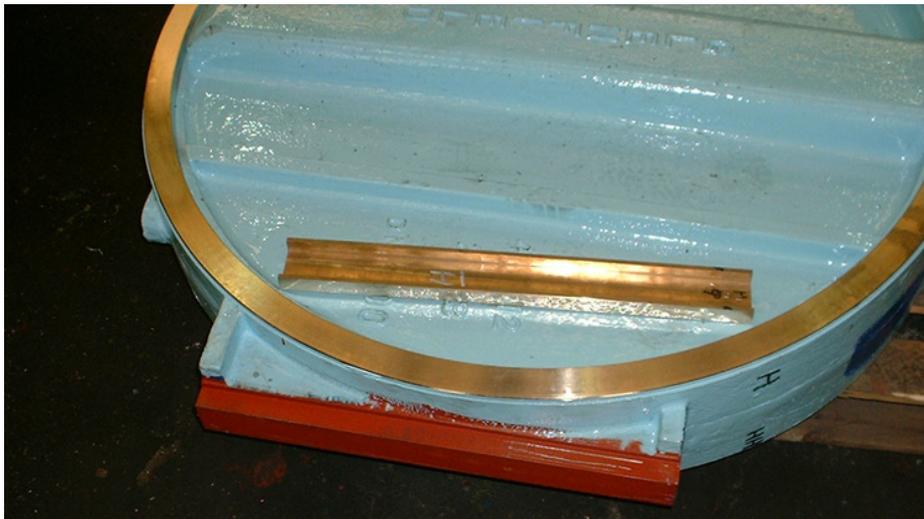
extruded aluminium bronze shoe fixed onto metal seated gate valve wedge
